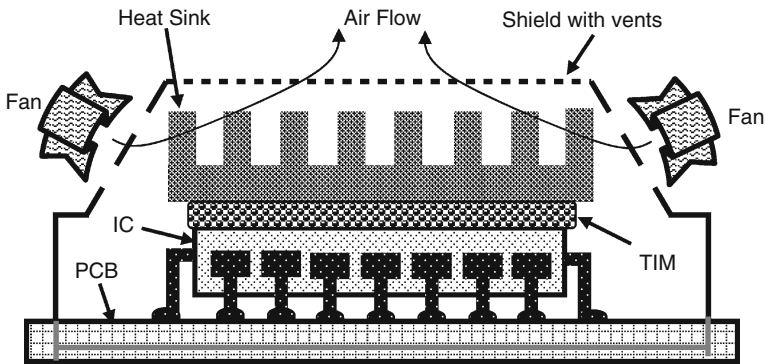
Illustration of the printed-circuit board and heat dissipating system enclosed with the ventilating electromagnetic interference shield (Tong 2009)
